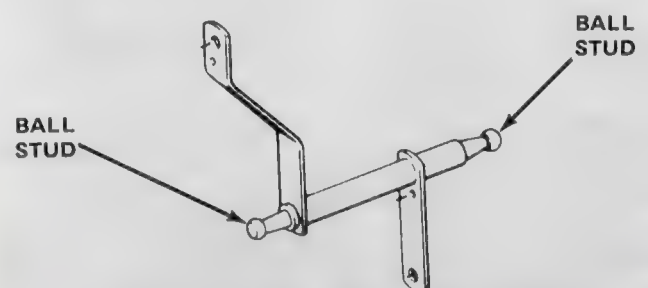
Six-Cylinder Clutch Bellcrank Pivot Ball Studs
